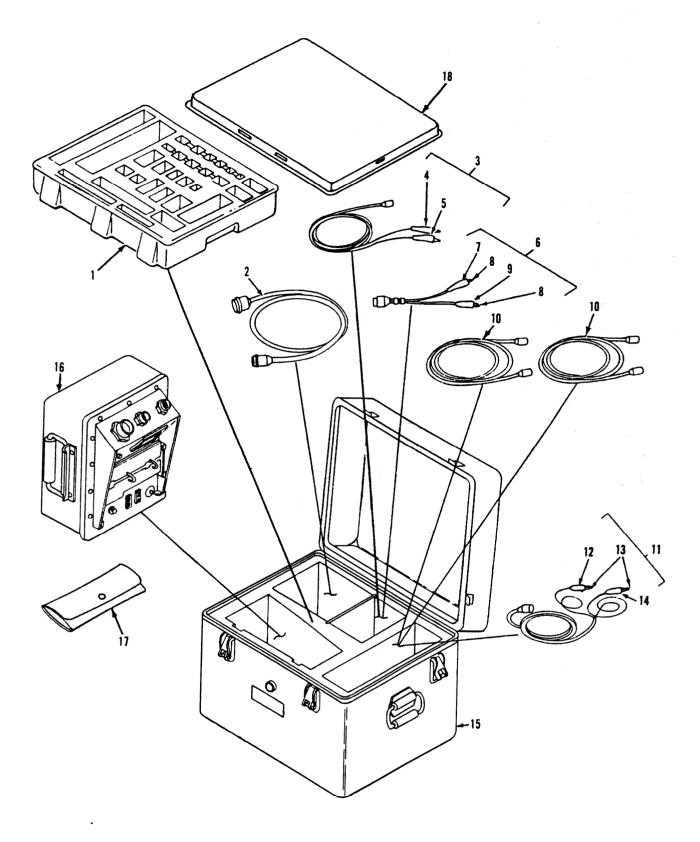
VTM/TRANSDUCER KIT ASSEMBLY.
